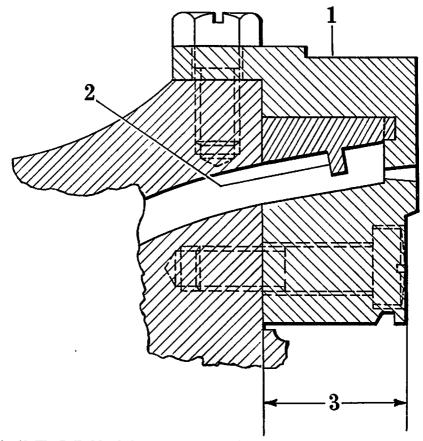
The Baffle Mouthpiece. This new type of mouthpiece is designed to mix the type metal before it enters the mold and to facilitate the escape of air from the mold as the cast occurs. A baffle 2 is accurately located at the back of the mouthpiece to achieve these results. As the type metal is forced upward through the crucible throat into the mouthpiece, it meets the baffle and is agitated and deflected under pressure to the mouthpiece jets. The agitation mixes the metal thoroughly and breaks up any hard particles or dross. The baffle mouthpiece is fastened to the crucible with screws, making it easier to adjust the mouthpiece sidewise and to remove it.
